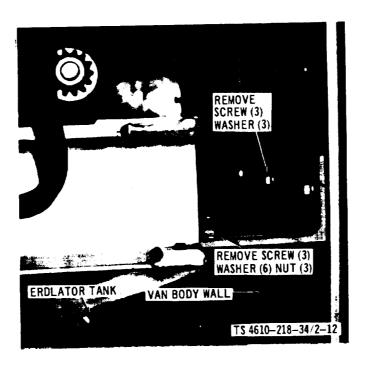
Erdlator Tank Top Mounting Bracket, Removal and Installation
